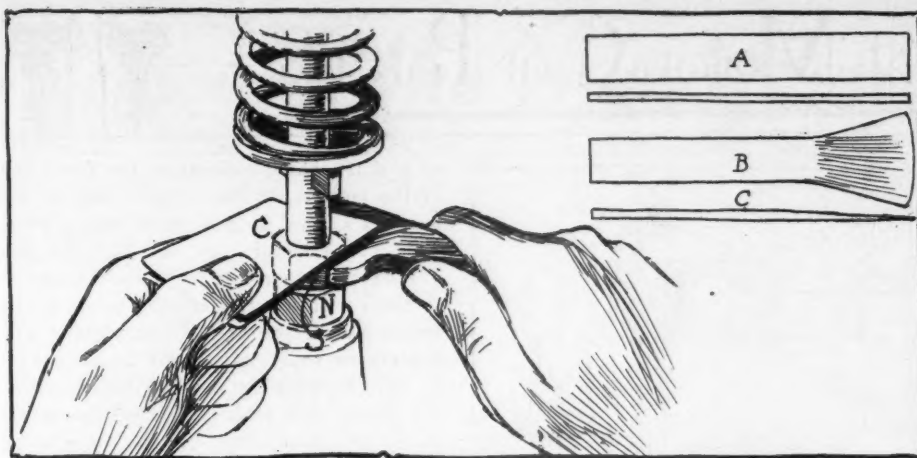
ADJUSTING VALVE TAPPETS AND A TOOL FOR LOCATING NOISY ONES
